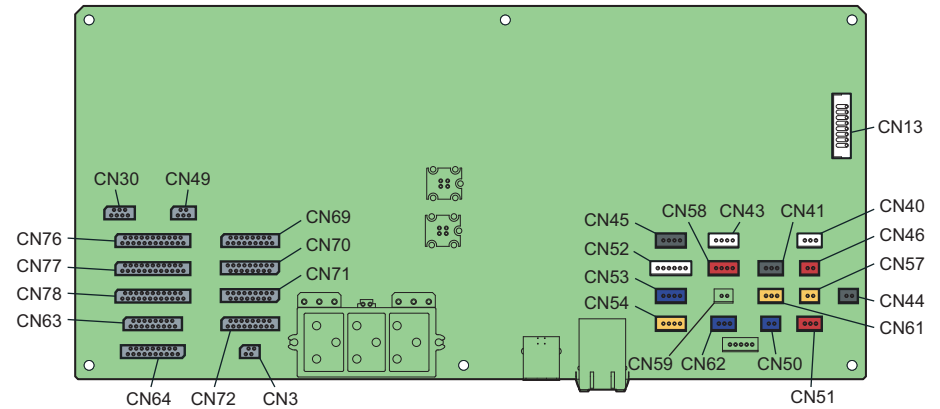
Connector Layout of the BOARD ASSY., MAIN
